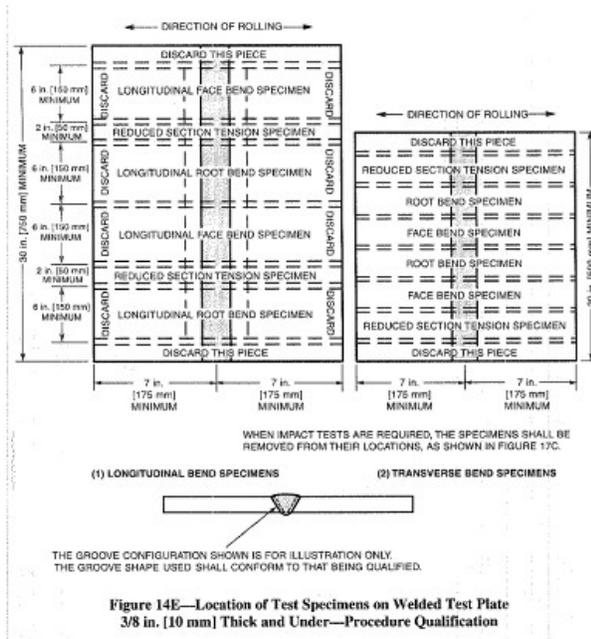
E—Location of Test Specimens on Welded Test Plate 3/8 in. (10 mm) Thick and Under—Procedure Qualification
